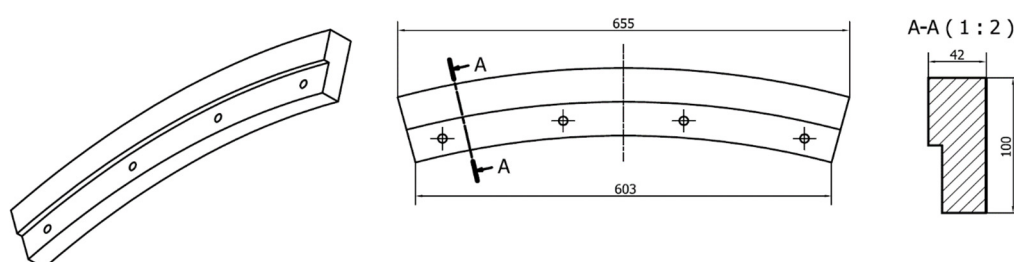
Spiral classifier edge lining—technical drawing (Dimensions in millimetres).
